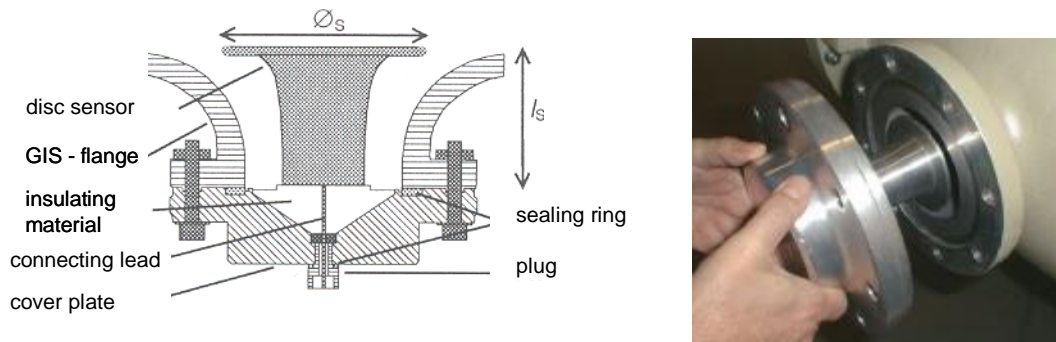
Sectional view and mounting of an UHF PD disk sensor [1, 28]
